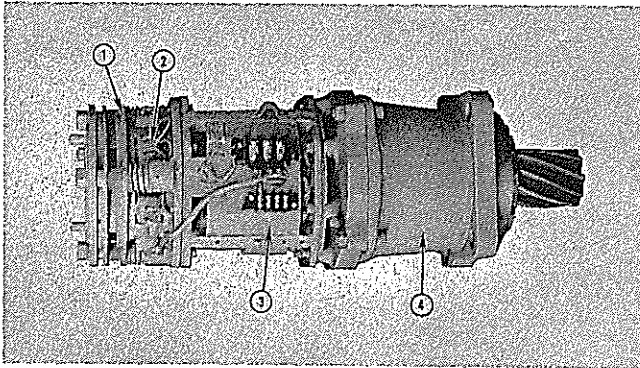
A.C. MOTOR AND GEAR BOX
